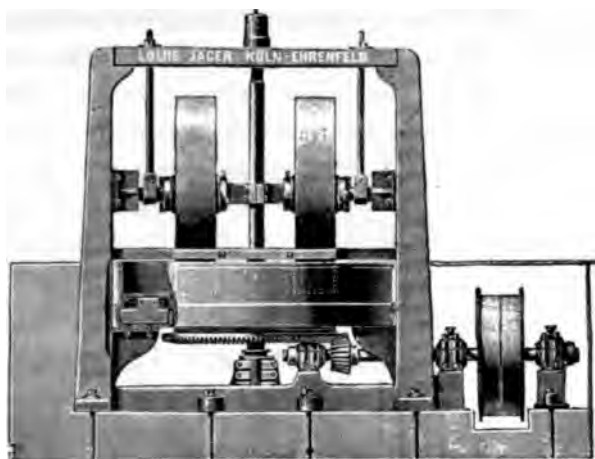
Crushing Mill with Movable Pan (Jäger).
